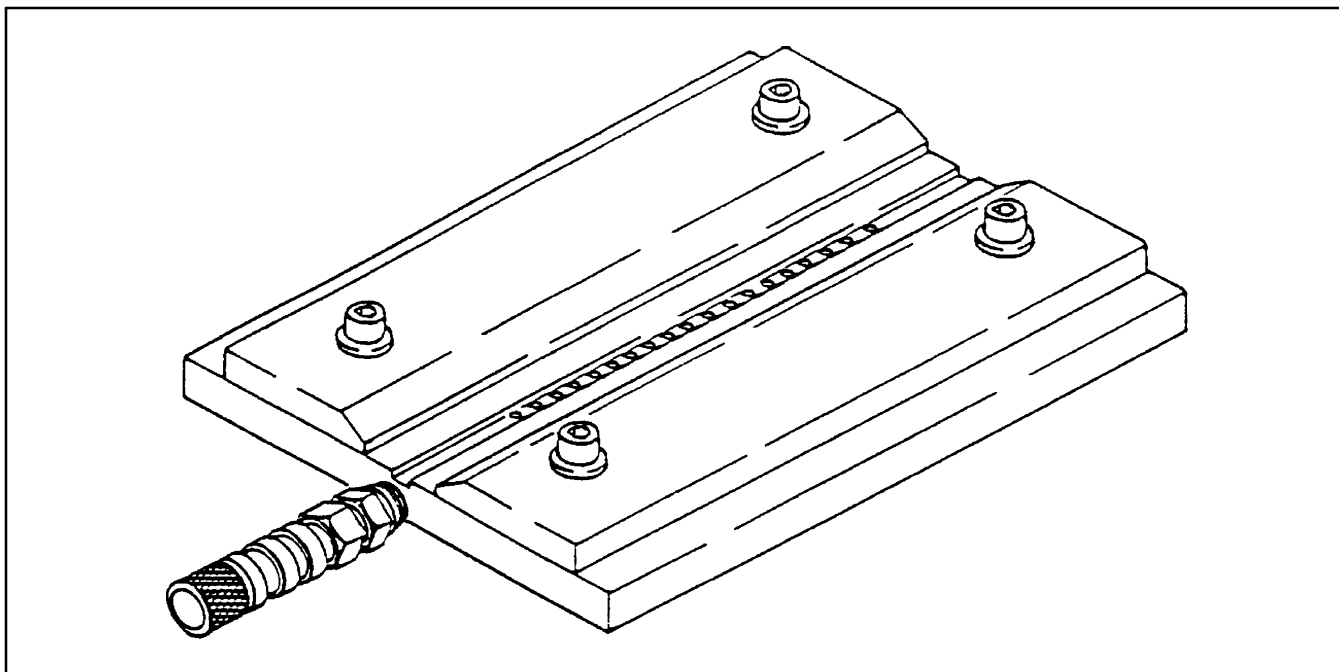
Butt Joint Welding Fixture, Pictorial (Typical)
